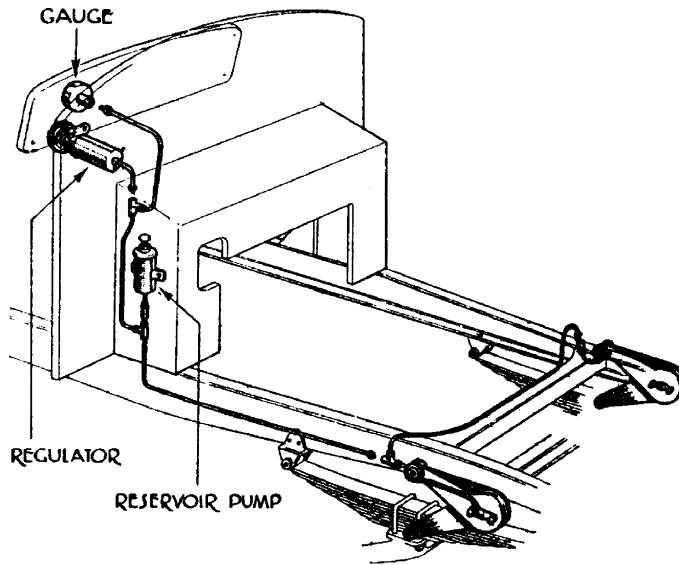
Layout of the hydraulically remote Andre Telecontrol damper, shown here on a front axle (The Motor Manual, 1939).
